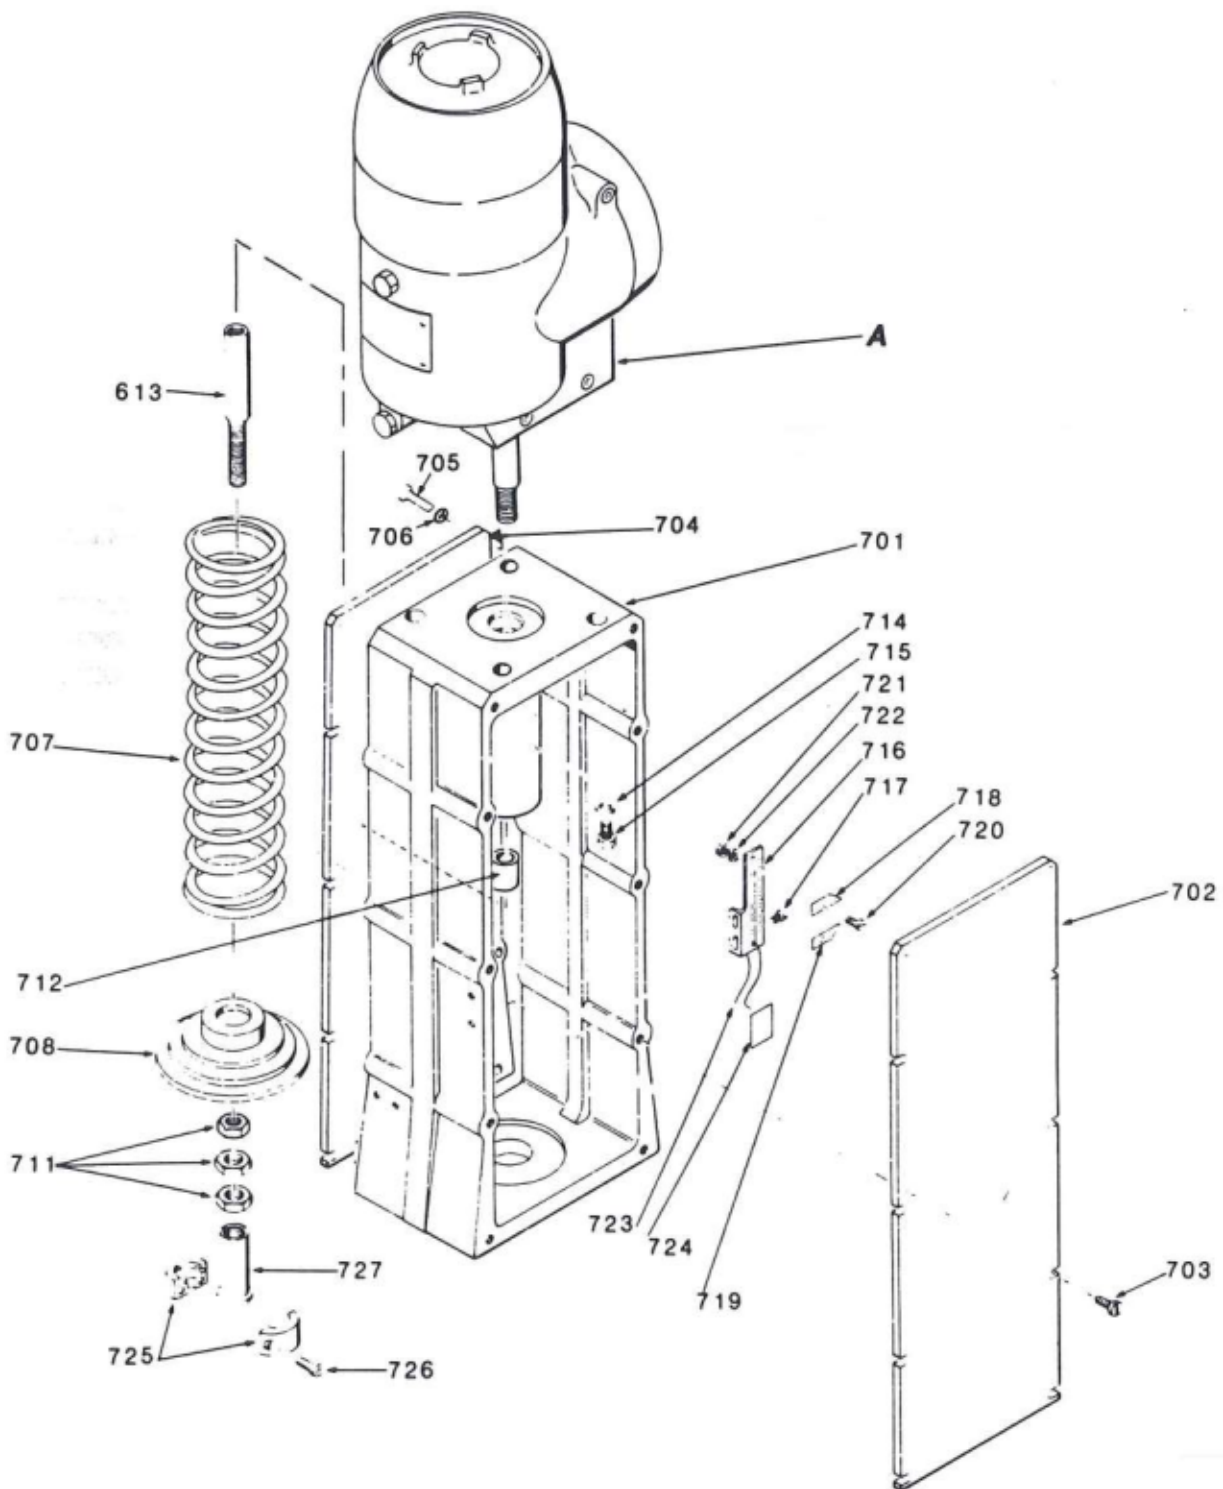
Exploded View for Spring and Yoke, Pull-Type
